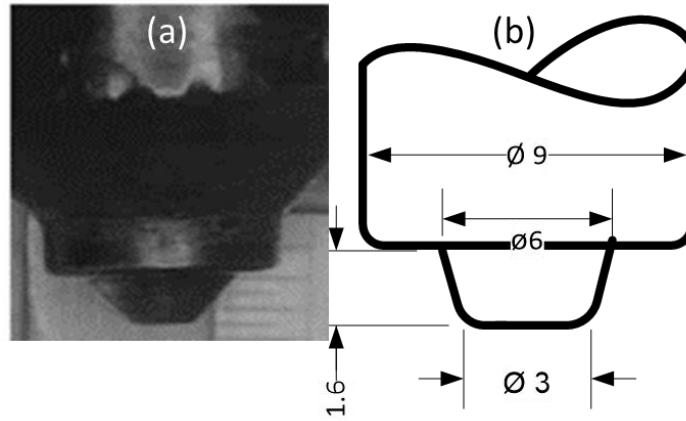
(a) Tool shape and (b) geometry [mm]
